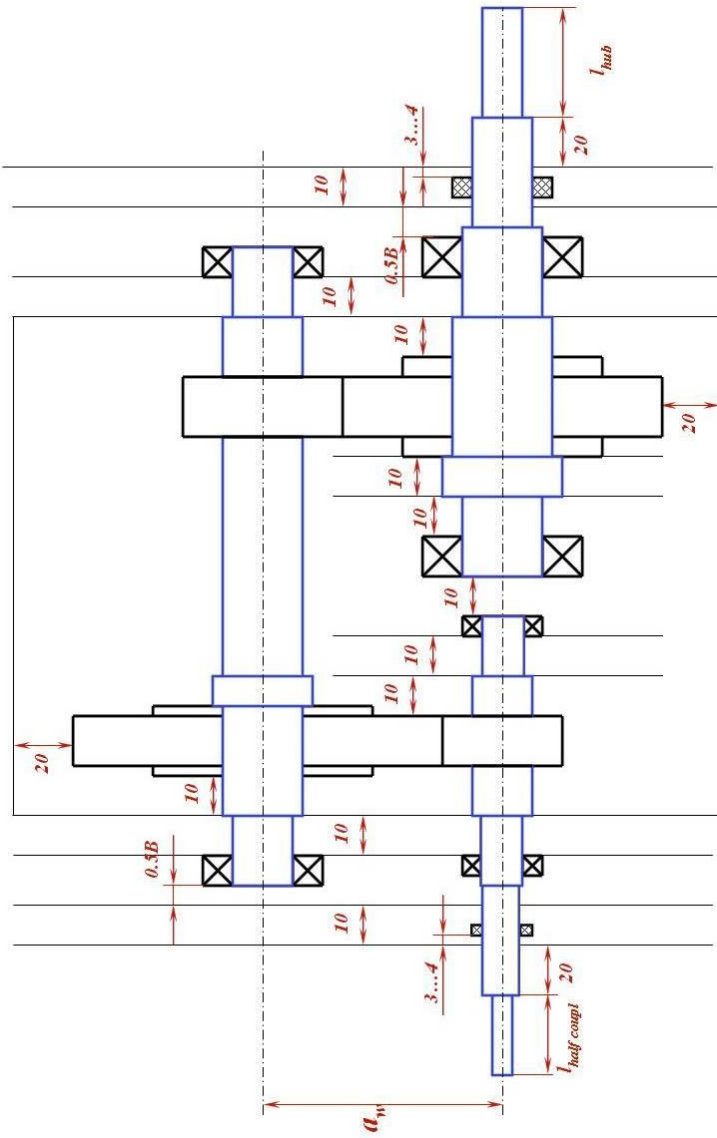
Sketch layout of double stage coaxial spur gear reducer
